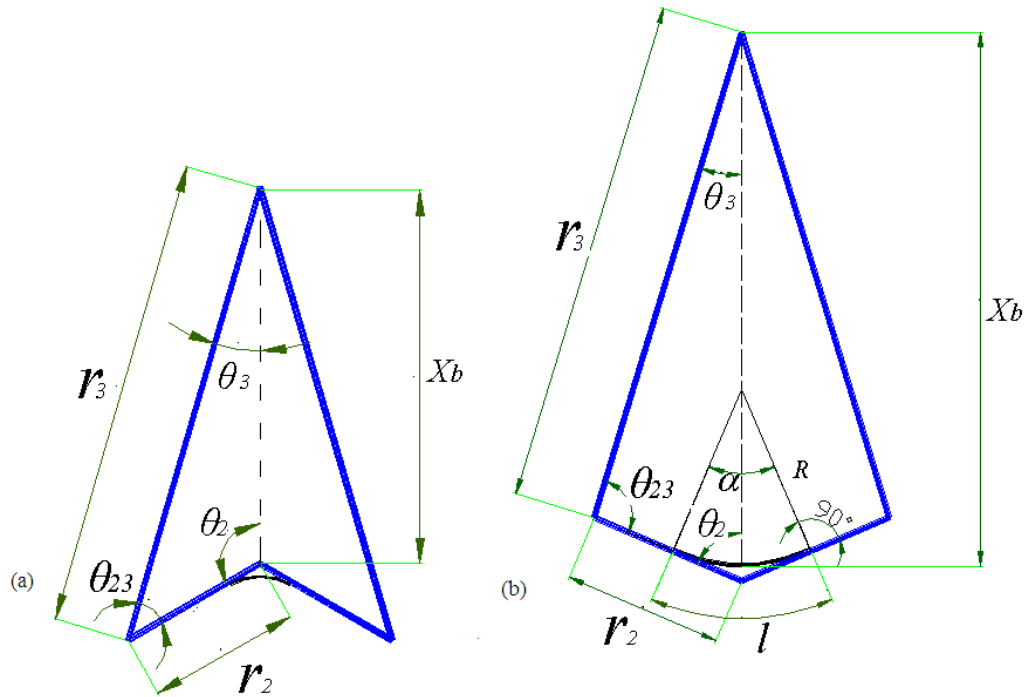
Geometrical parameters of the tool and sheet metal specimen (a) bending direction and (b) reverse bending direction
